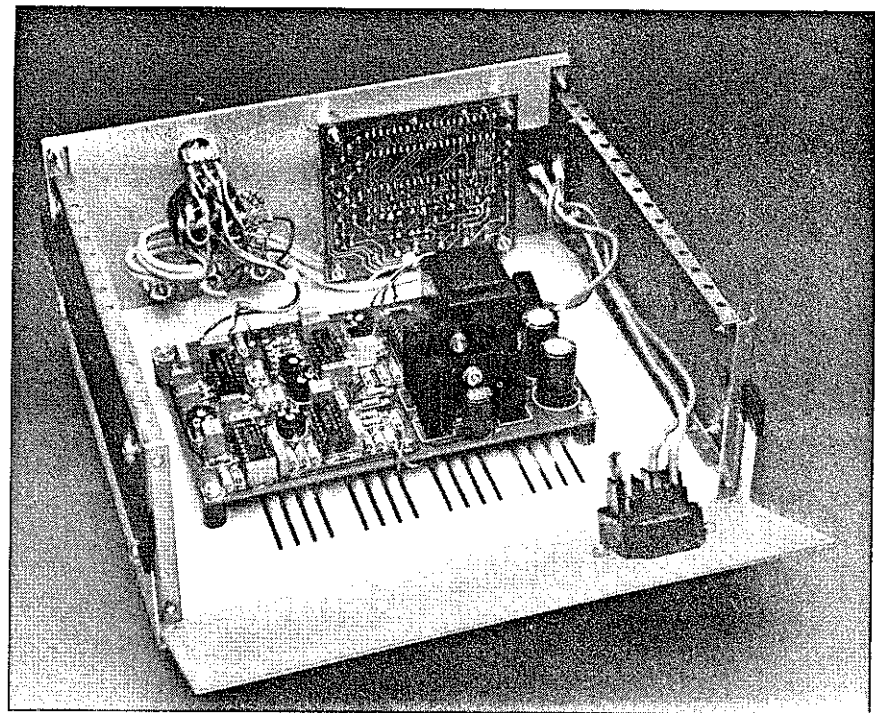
Inside view of meter with top panel removed and rear panel hinged down.
